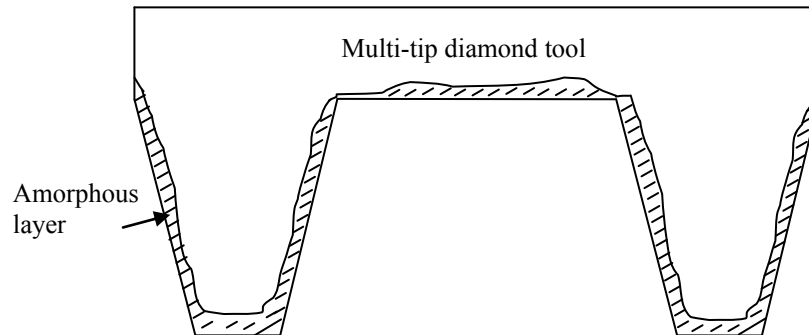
Schematically show of the early tool wear region of a multi-tip diamond tool by considering FIB-induced damage layer.
